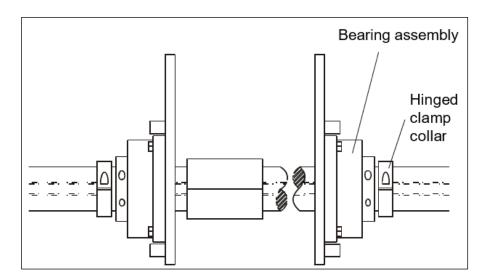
ID-MOUNT BEARING SUPPORT ASSEMBLY (LEFT) AND HINGED CLAMP COLLAR (RIGHT)
